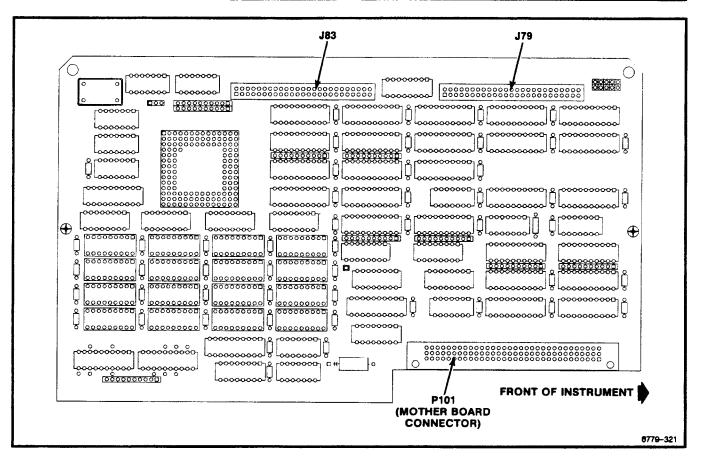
Connector locations for removal of the A15 Memory Manager Unit board.
